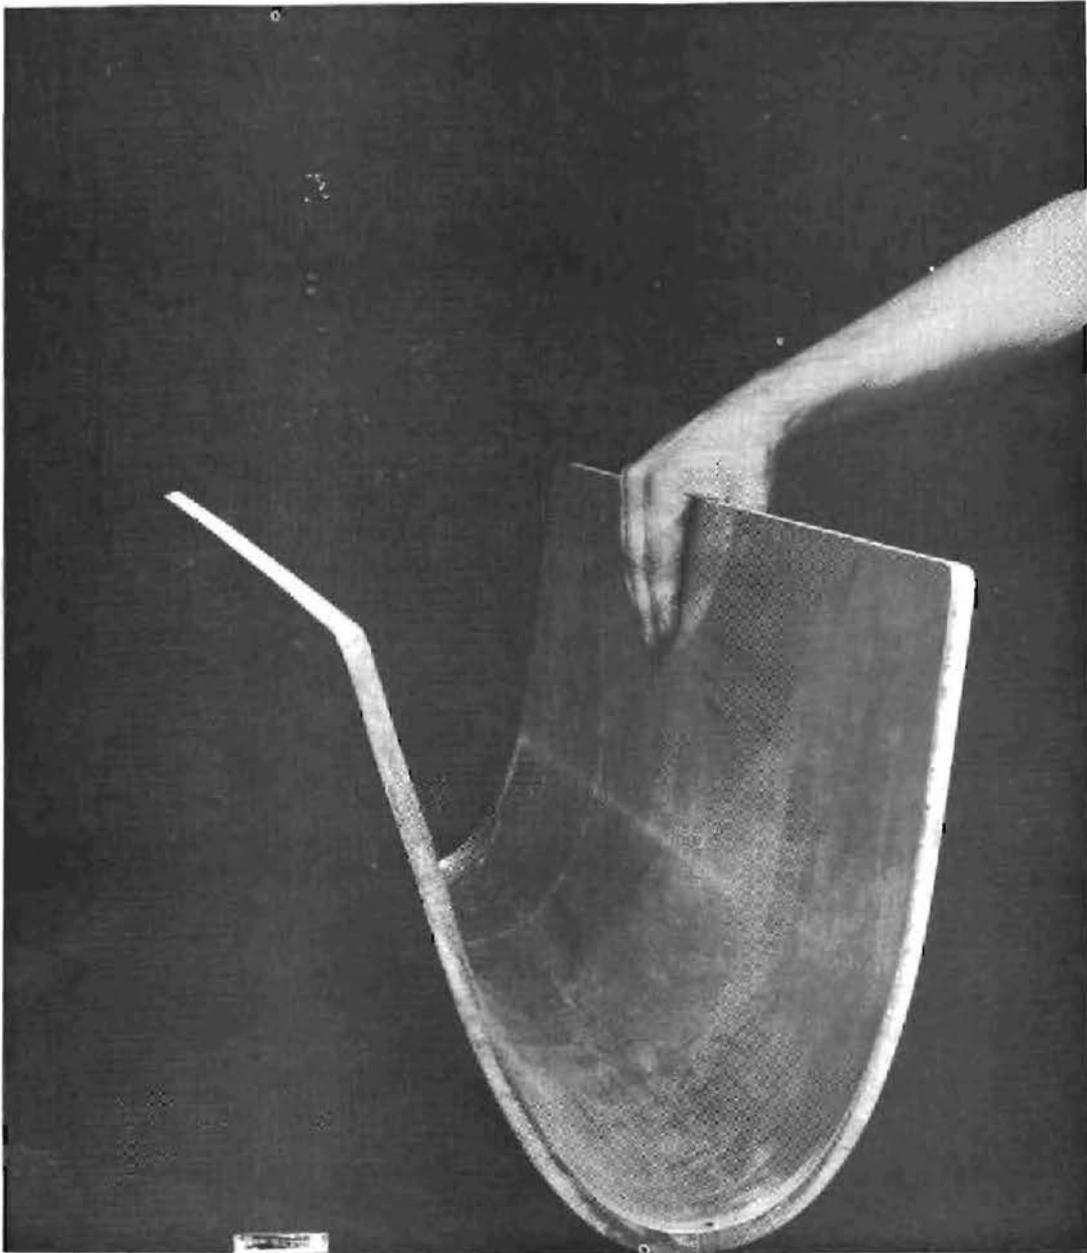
Trimmed curved sandwich having aluminum faces on a 1/2-inch thick balsá core. Minimum radius is about 2-1/2 inches.
